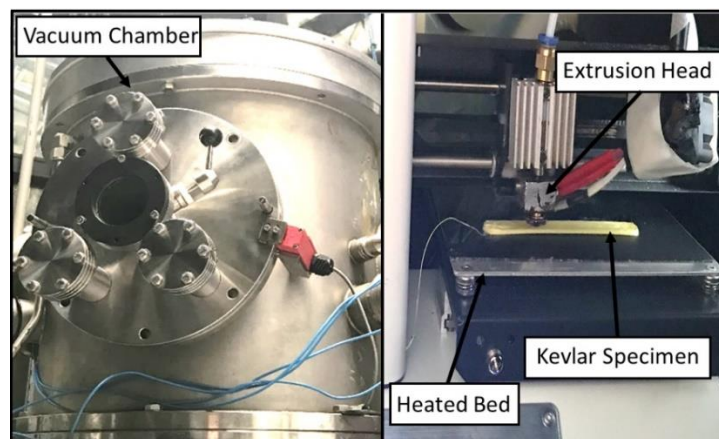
Left*: vacuum chamber inside which the parts were printed, *Right*: printer arrangement inside the chamber showing the extrusion head used to print Kevlar reinforced PA on a heated bed.
